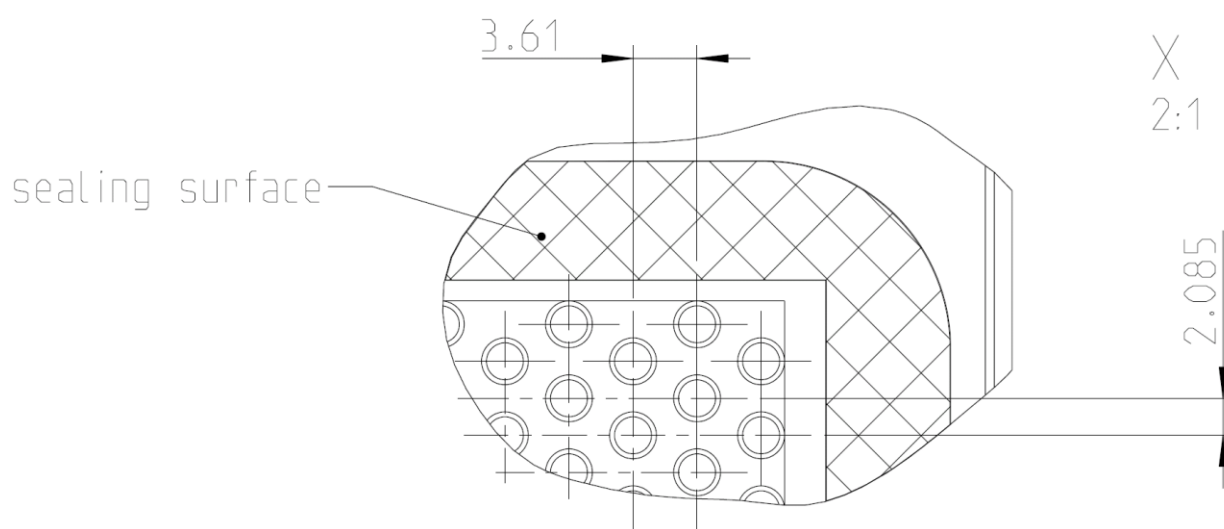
“X”- section Detail drawing of the HybridPACK™ 2 bottom side. The sealing surface corresponds to the O-ring holding groove.
